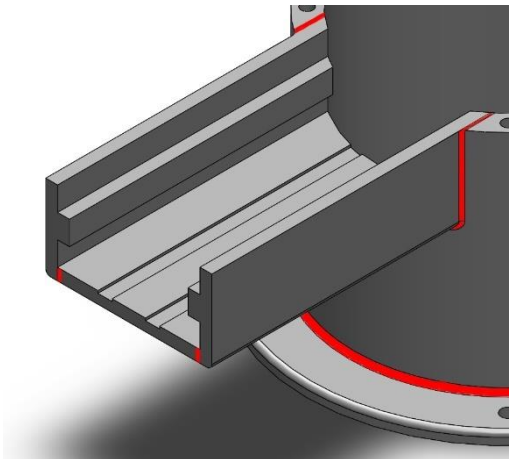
Welded connection between the top cylinder and outer arm.
